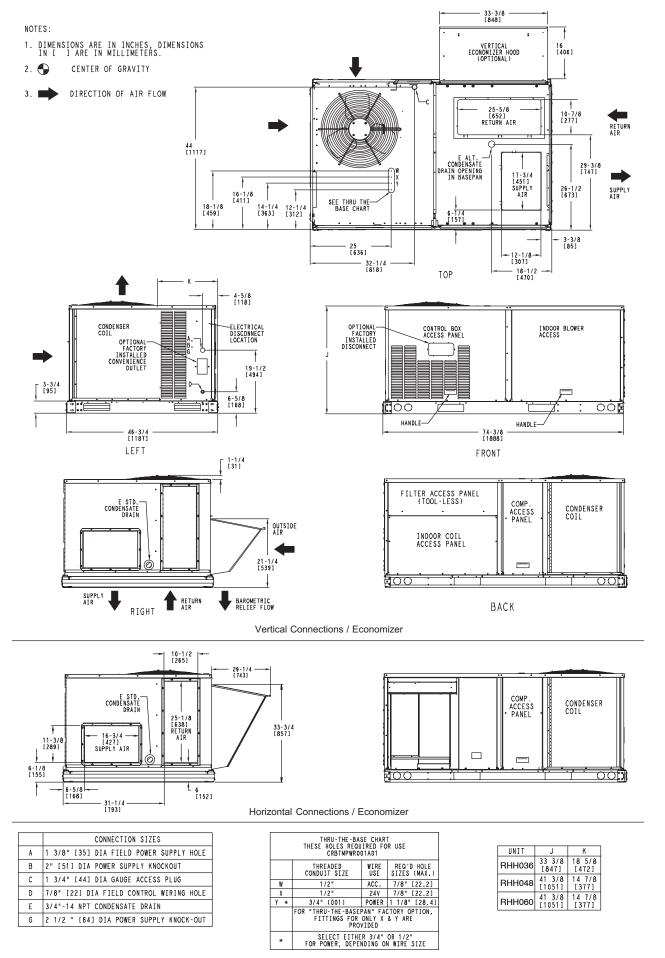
Unit Dimensional Drawing – RHH036 – 060
